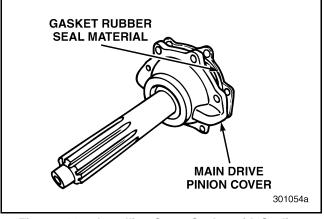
Installing Cover Gasket with Sealing Material Facing Cover
